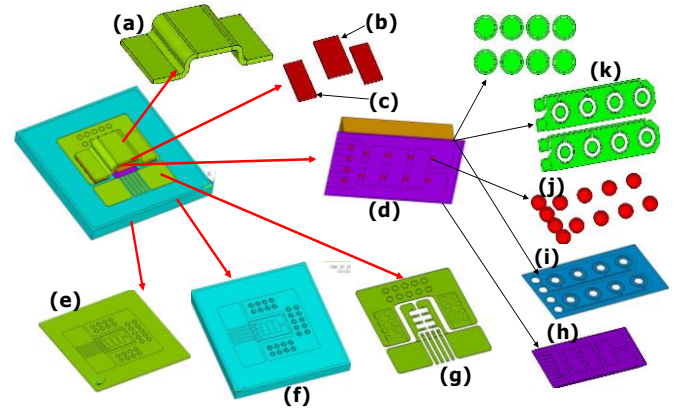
Components of package structure (a) Copper foil, (b) solder layer between copper foil and die, (c) solder layer between copper foil and PCB, (d) chip package, (e) copper layer on the bottom of the PCB, (f) PCB, (g) copper layer on top of the PCB, (h) underfill, (i) polyimide, (j) solder bump, and (k) aluminum layer
